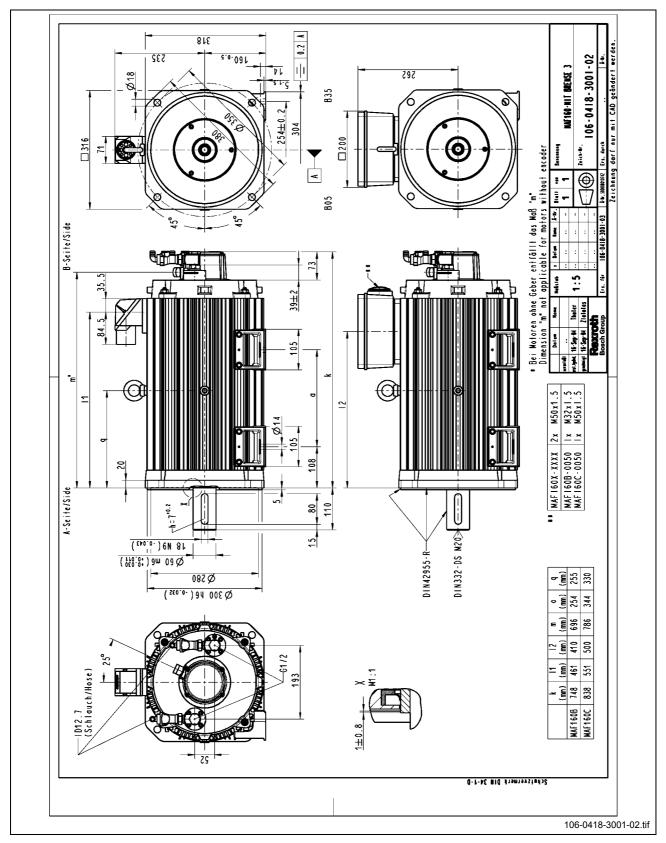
Dimension sheet for MAF160, with brake 3
